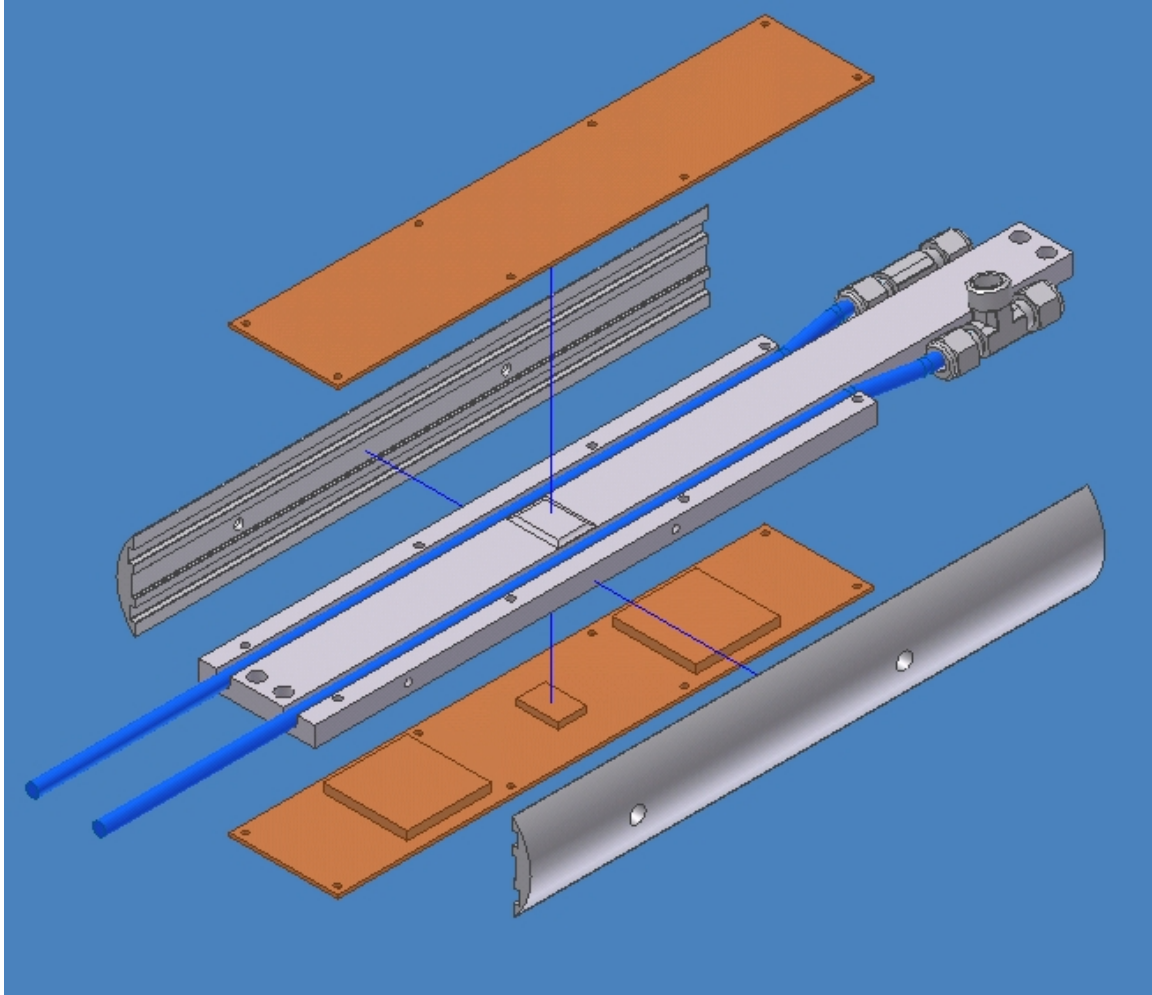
Exploded CAD Drawing of Cold Plate, Side Rails, and PCBs
